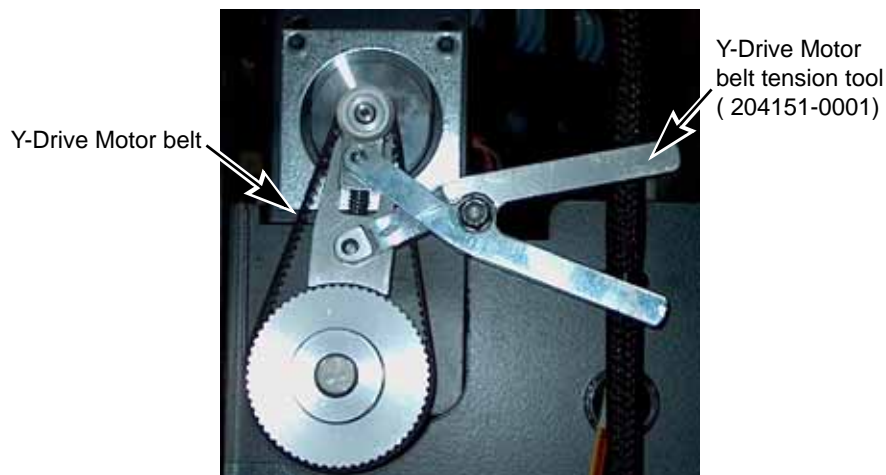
Y-Drive Motor Belt and Tensioning Tool
